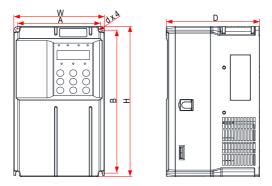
External dimensions and mounting dimensions of 0.4–15 kW AC drive models
